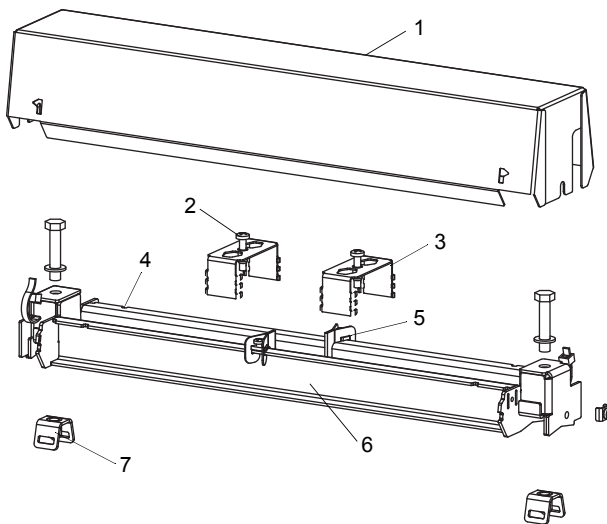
Dismounting of the transducer mounting fixture Variofix C
